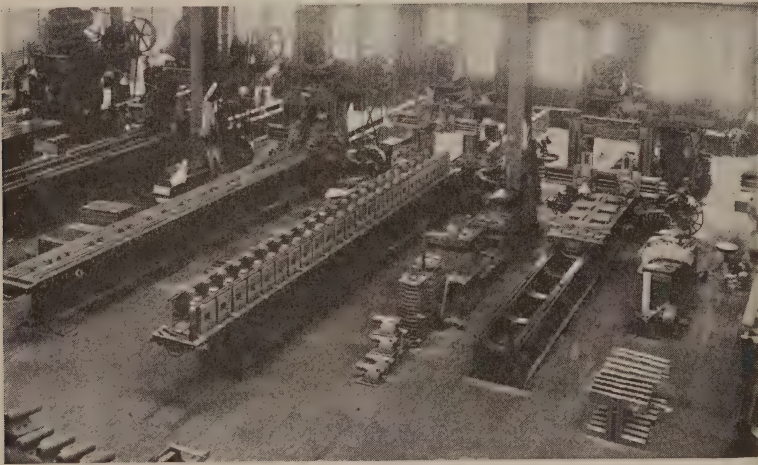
Planer work. (*Courtesy of The Hendey Machine Company.*)
